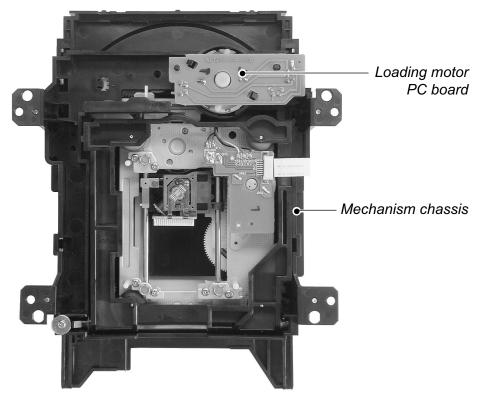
Mechanism chassis assembly (Bottom side)
